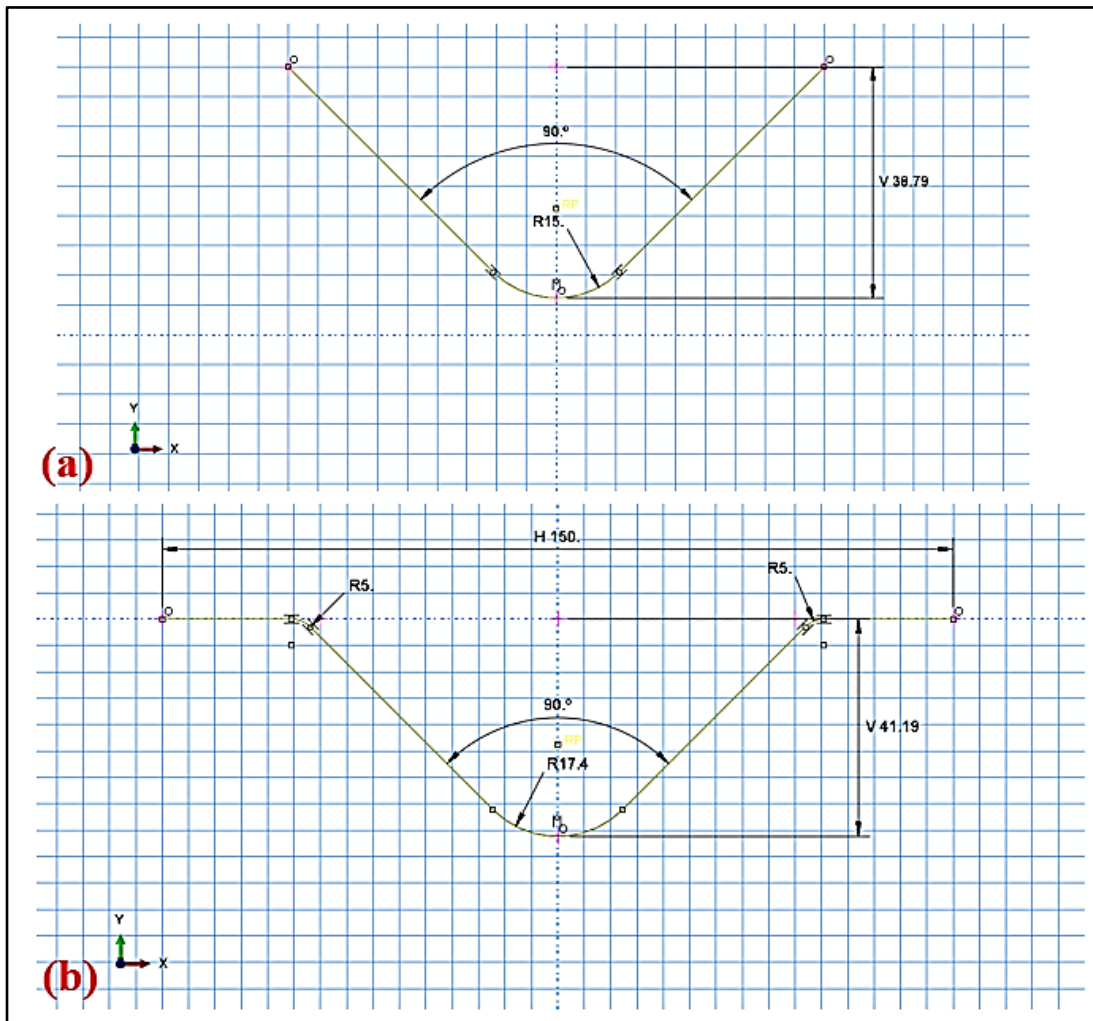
CAD model of (a) Punch and (b) Die for blank of 3-ply clad
